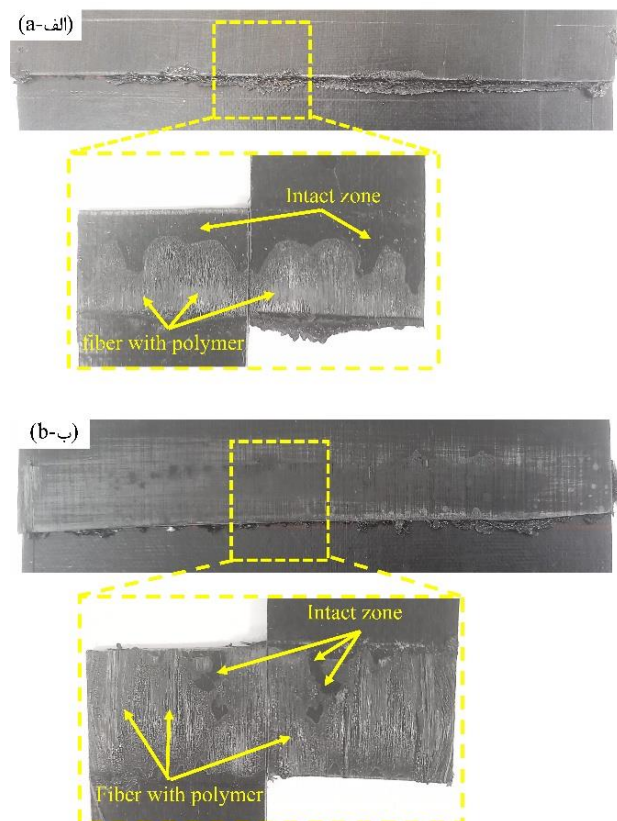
Weld line and a sample of its fracture surface. (a): Test number five, power 900W, pressure 1bar and speed 20mm/s. (b): Test number six power 900W, pressure 3bar and speed 20mm/sec.
